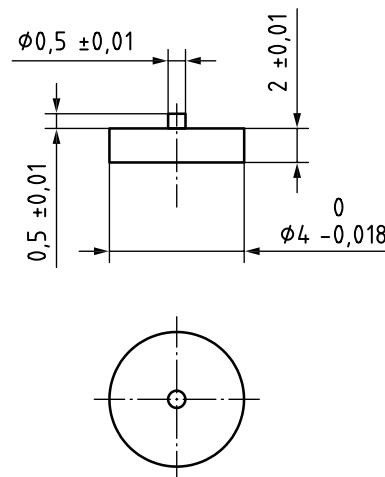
Cap required for the production of test pieces used for the measurement of dimensional change during hardening
